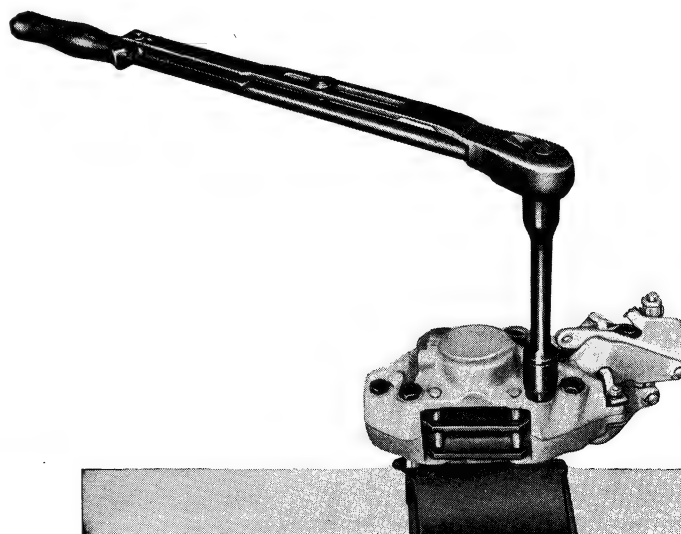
Drawing up caliper half interlocking screws using a torque wrench.
